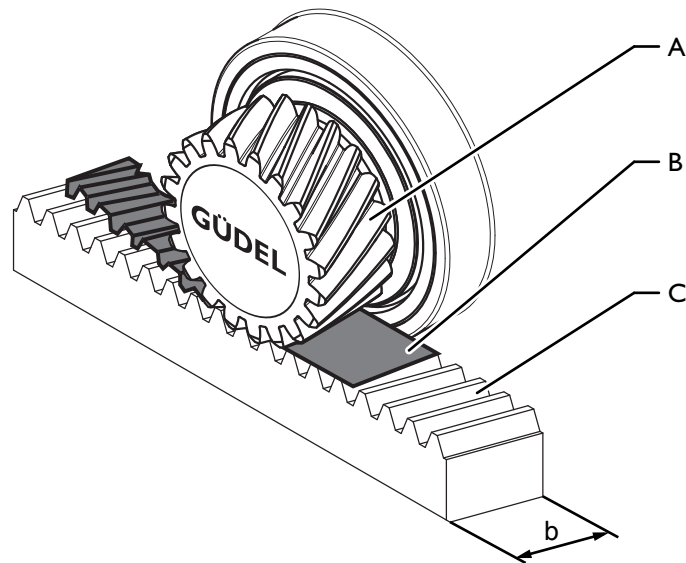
Checking the tooth flank backlash: Paper strip (inexact method)
